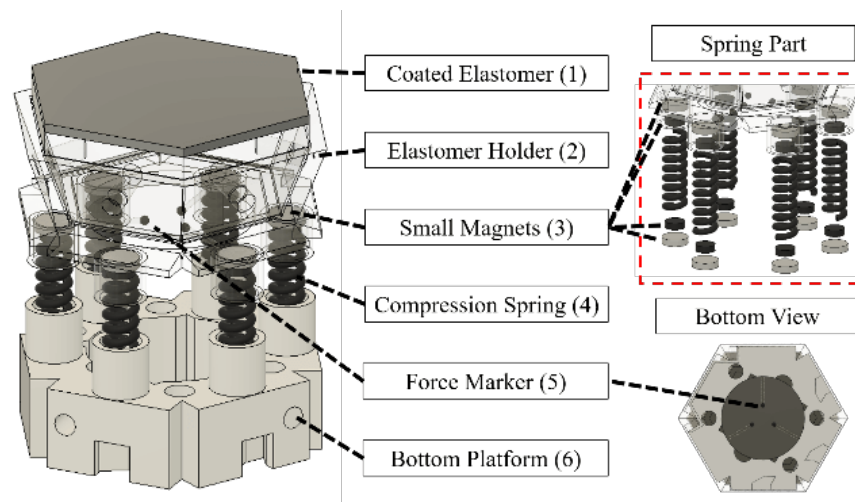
CAD drawing of the proposed spring-mechanism structure, which is made of five components shown as (2) to (6). The top section is composed of the elastomer holder which has 6 magnets glued at its downward plane. The middle section includes 6 springs with 12 magnets glued on both ends. The bottom platform has 6 magnets glued on its upward plane.
